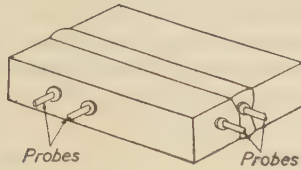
Method of Using Flat Probes on Gas-Cut Edge.
